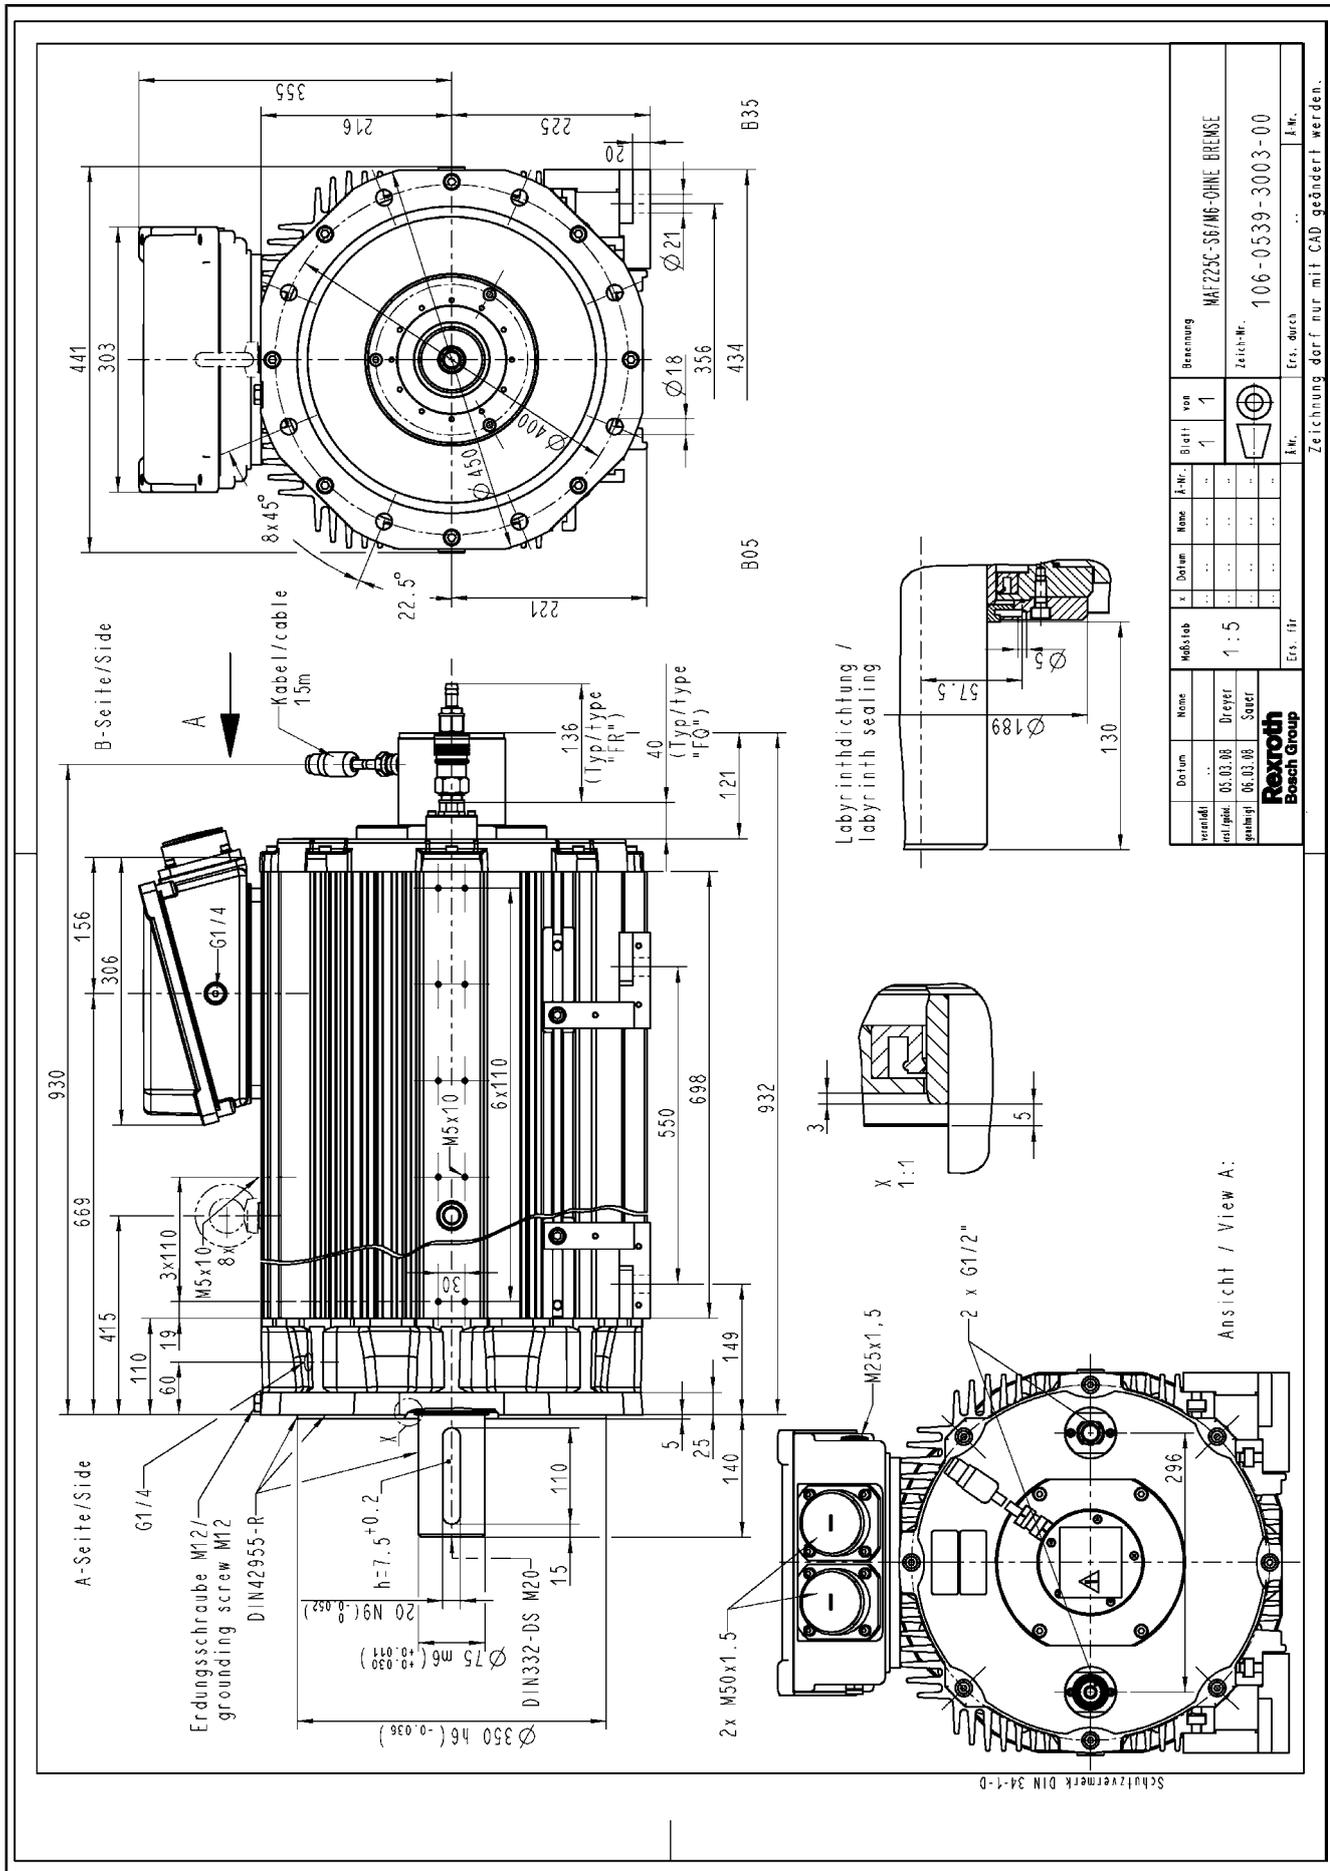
MAF225 with encoder M6/S6, without brake (terminal box rotatable)
